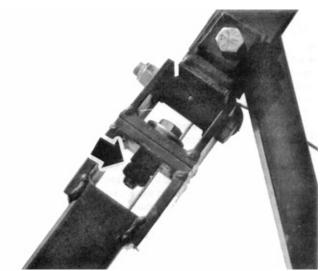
Loose Outer Boom Radius Arm Bolts.
